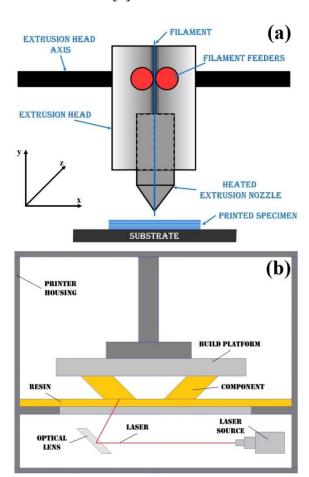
Fused filament fabrication technique (a); stereolithography technique (b).
